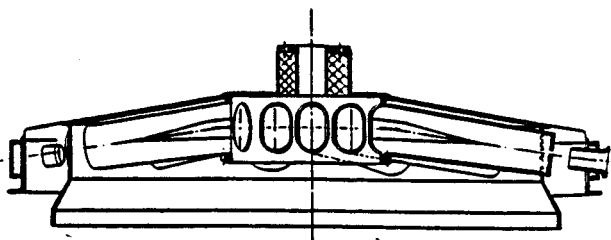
Tubular-to-Elliptical CGR Combustor
